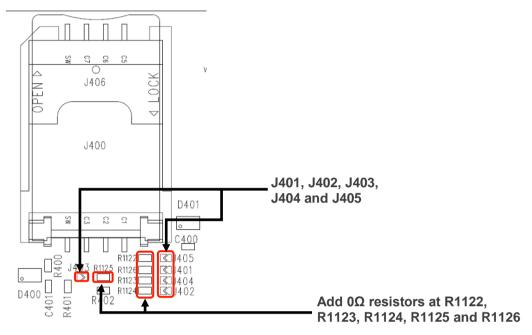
Solder Pads and Resistor Locations on the SIM Interface
